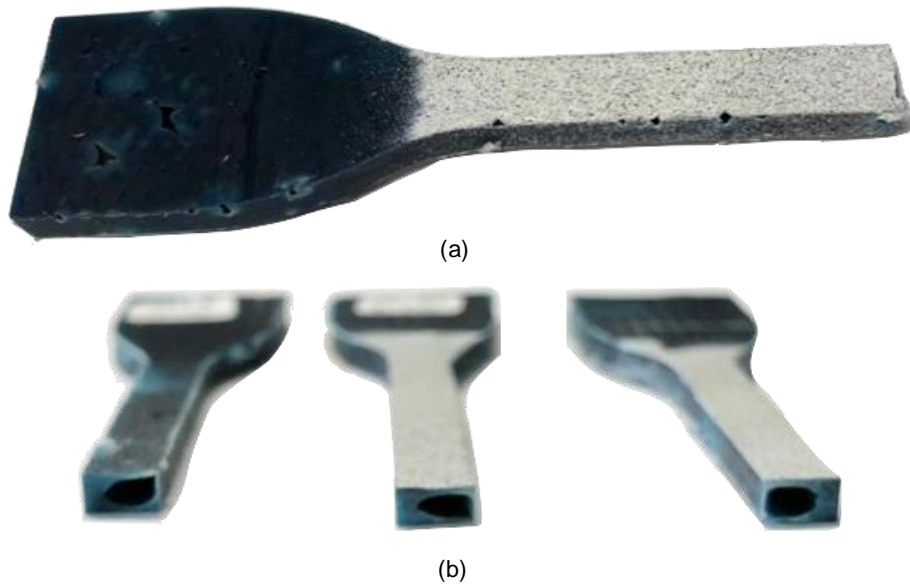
Fracture for three 75% rPP mixture test specimens: (a) gaps in the gauge length (b) closer detail of the fracture area
